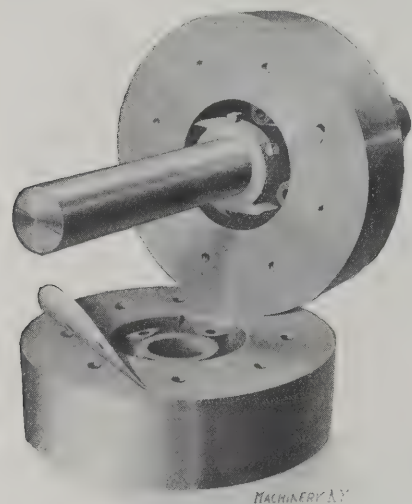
View of Pulley in Halves, showing Oil Reservoir and Collar
